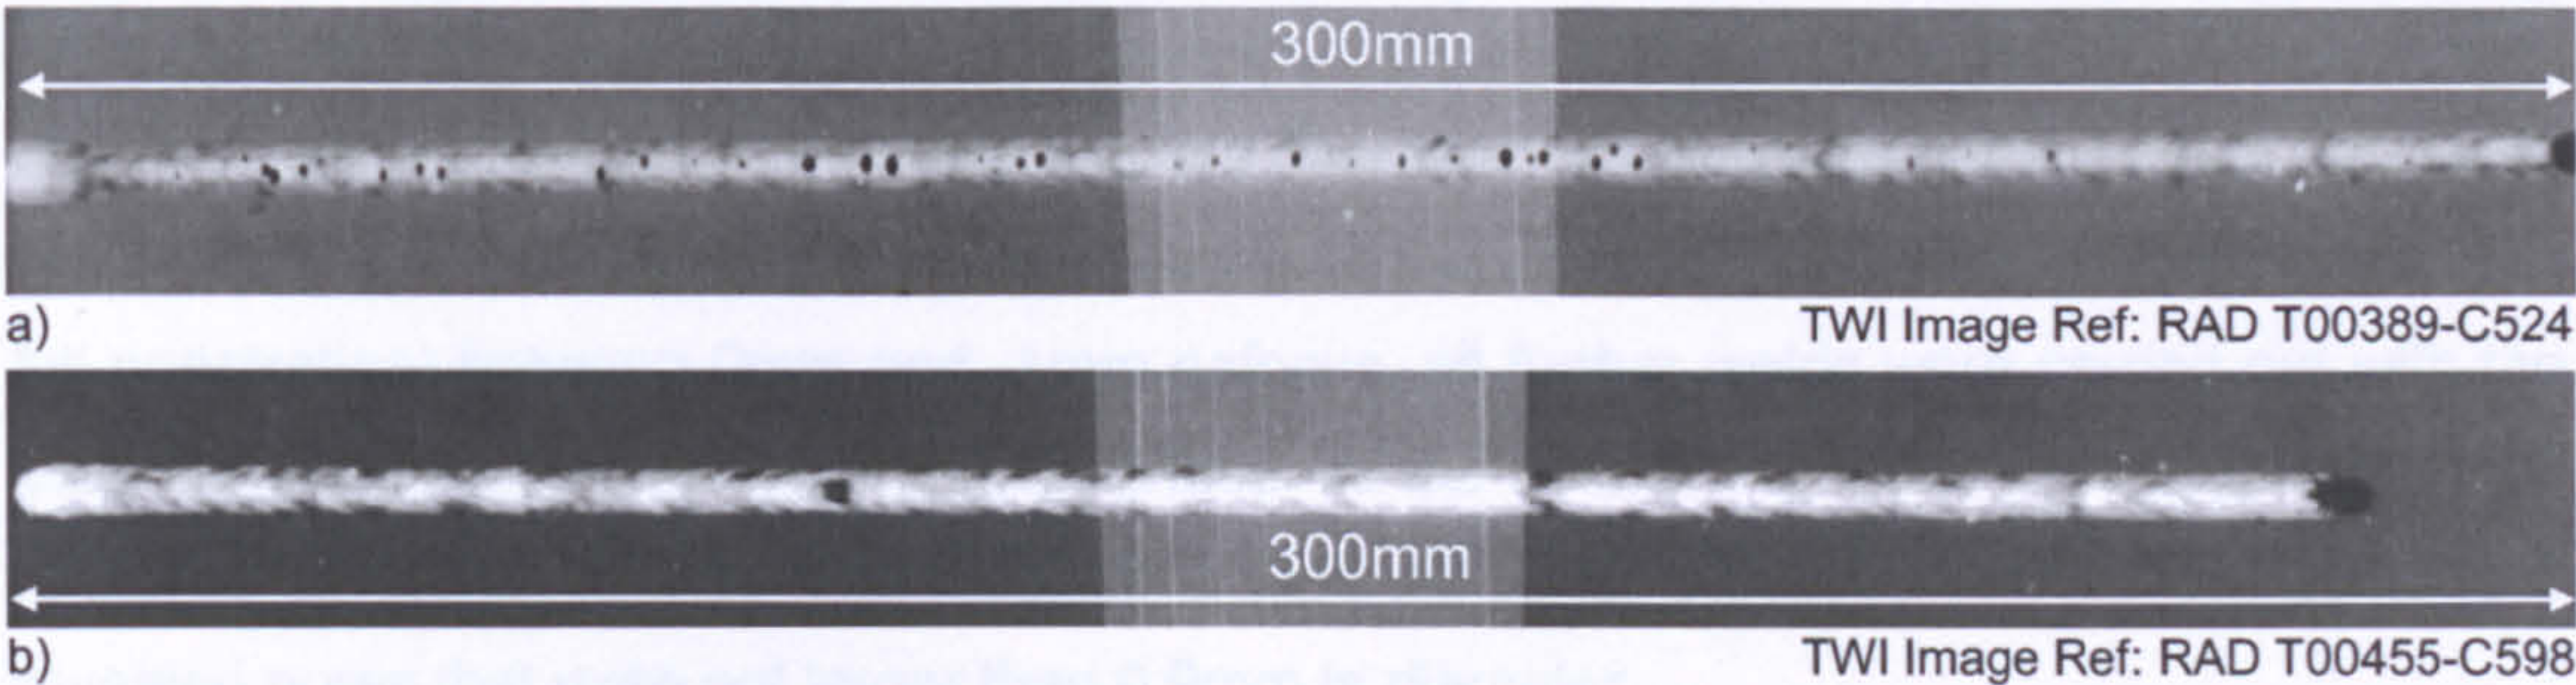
Radiographs of typical welds produced in 3.2mm thickness 2024 alloy, using 3.1kW of power focused in a Ø0.6mm spot positioned 1mm below the material surface, and:
